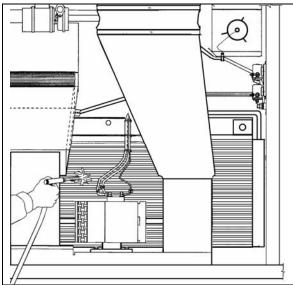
PASSENGER'S UNIT EVAPORATOR COIL 22226
